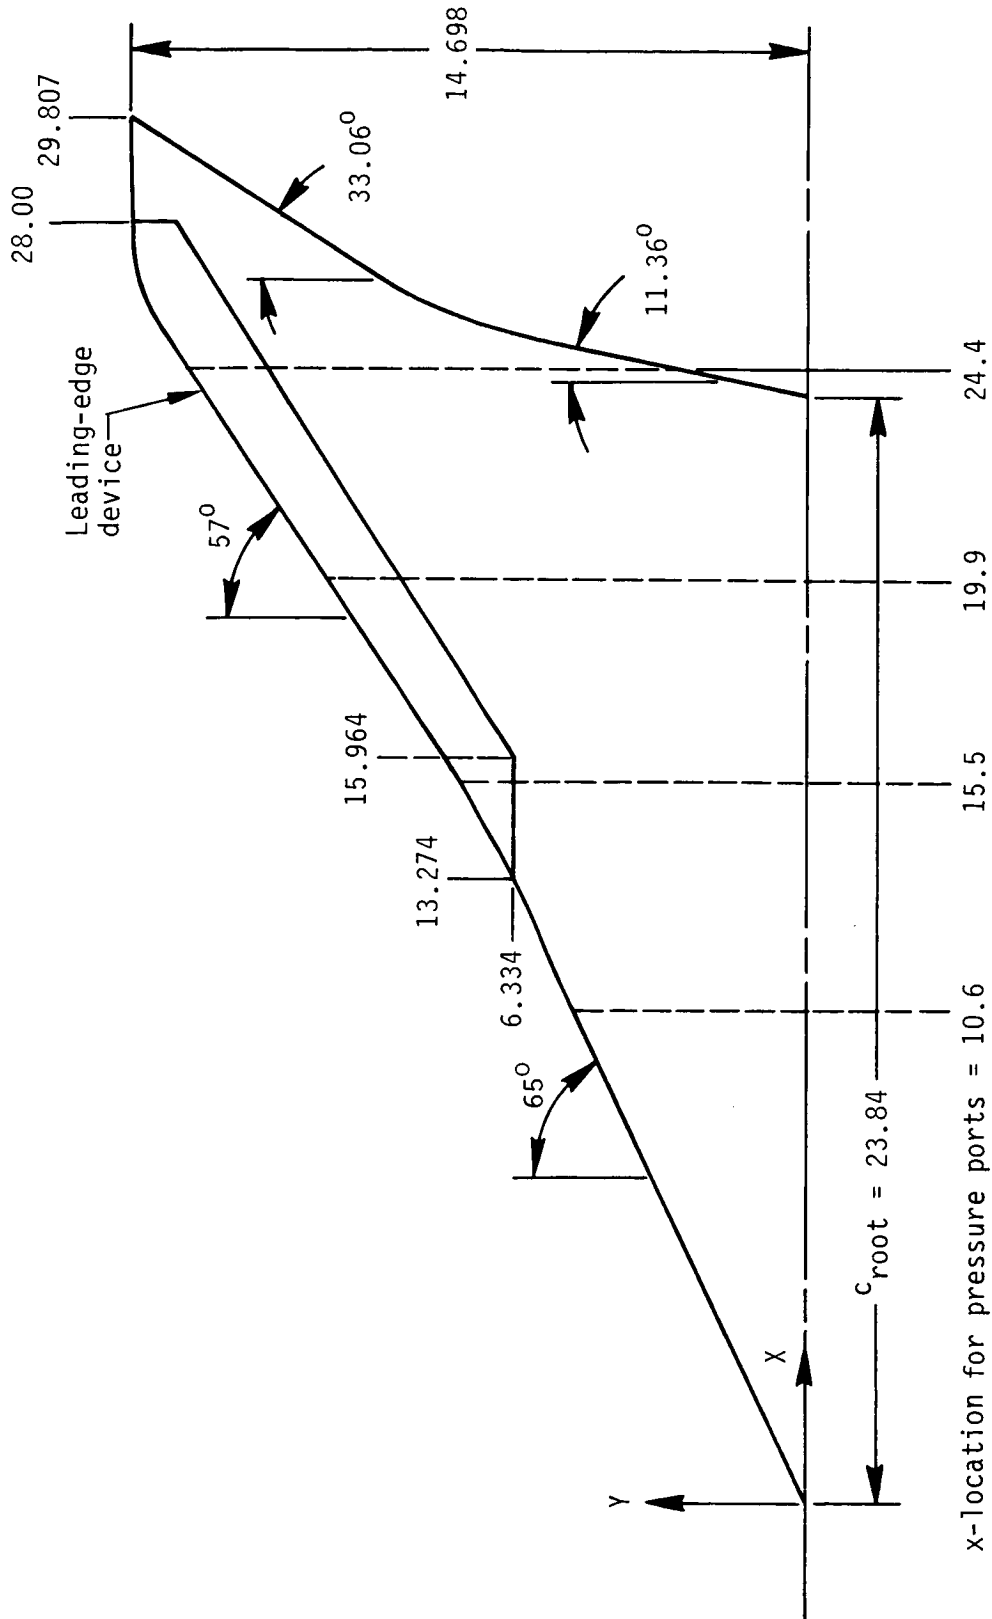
Wing planform. (All linear dimensions are in inches.)
